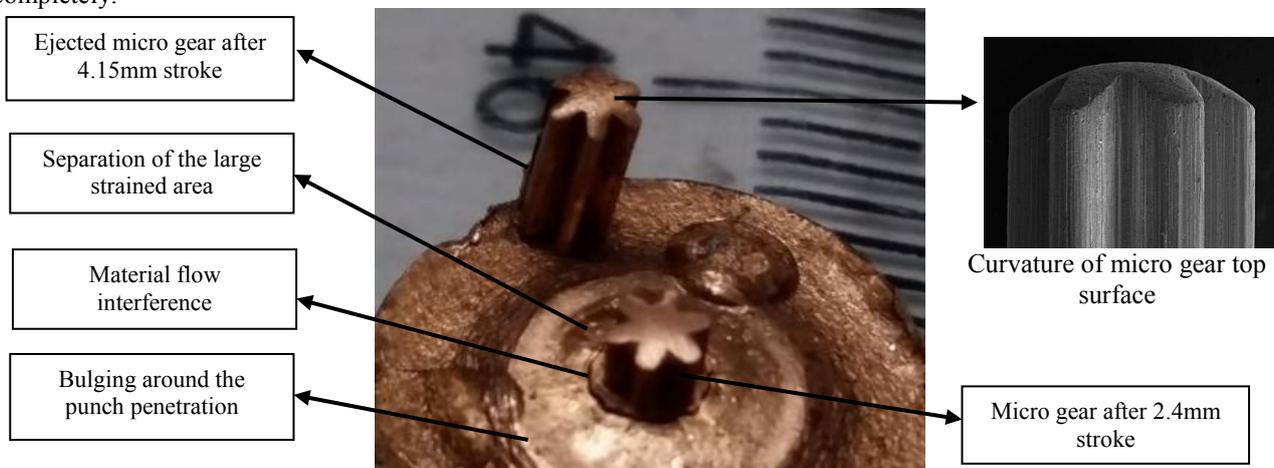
Micro gear formed by single extrusion process at 2.4mm and 4.15mm stroke
